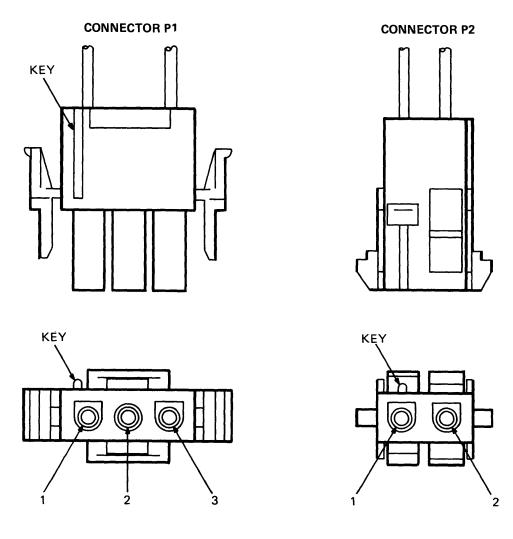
Power Supply ac Cable, Connector Pin Locations
